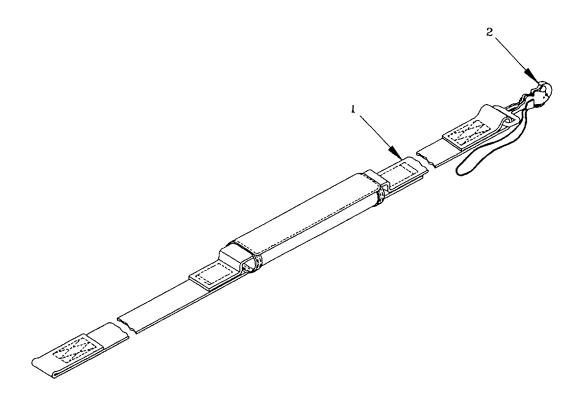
LINE, EQUIPMENT LOWERING, 8-FOOT
